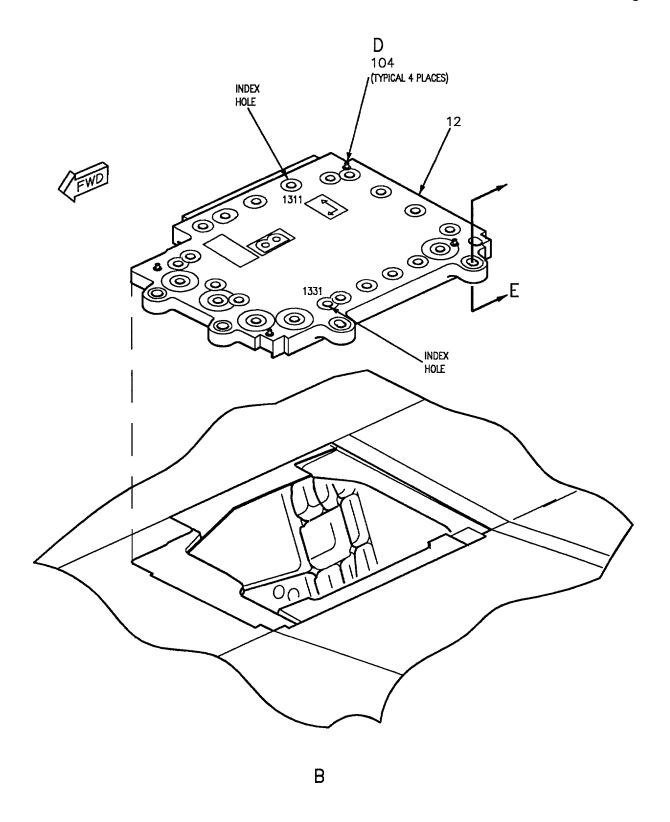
Installation of Plate Set for Drilling Door 78 Substructure (Sheet 2)
